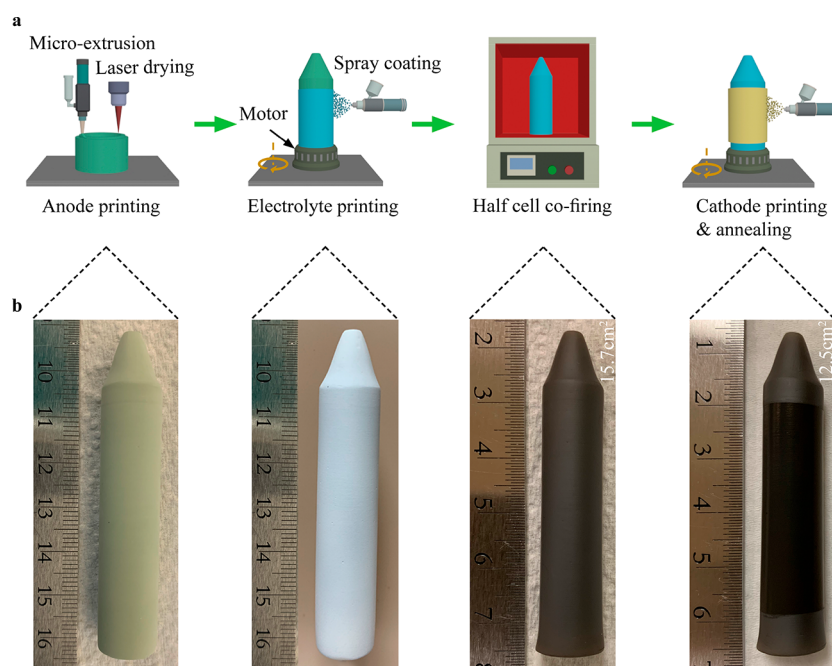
Schematic illustration of the manufacturing of a single tubular PCFC by 3DP. (a) Schematic of the manufacturing process. (b) Photographs of the tubular PCFC at different manufacturing steps.
